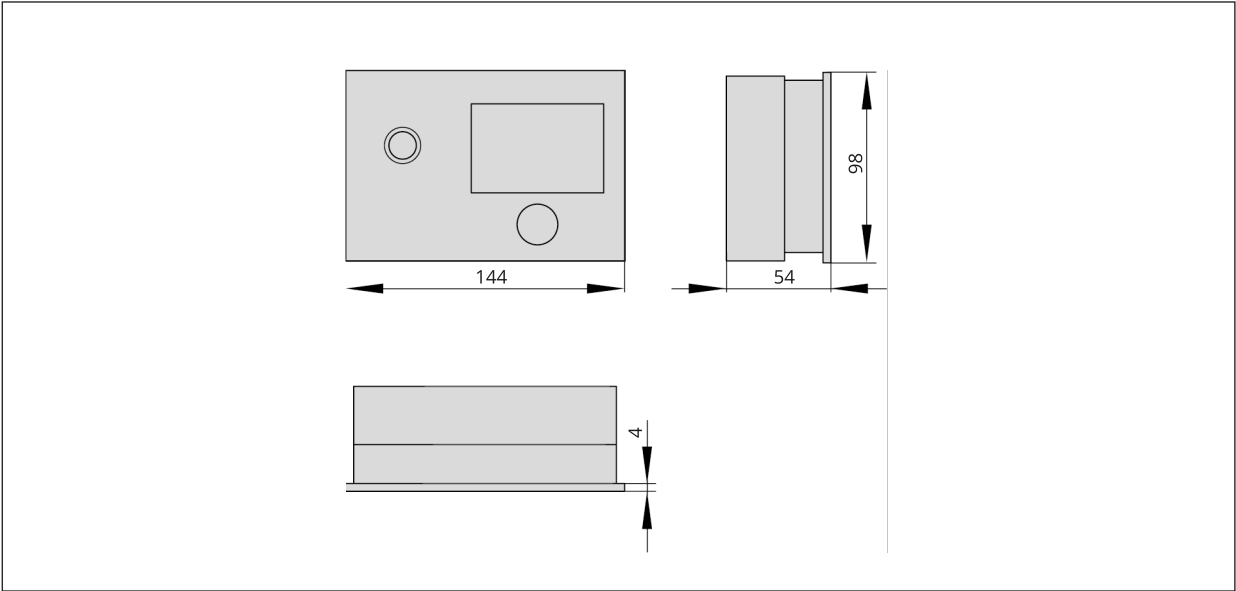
Dimensions in mm · Heating and district heating controller with standard base
